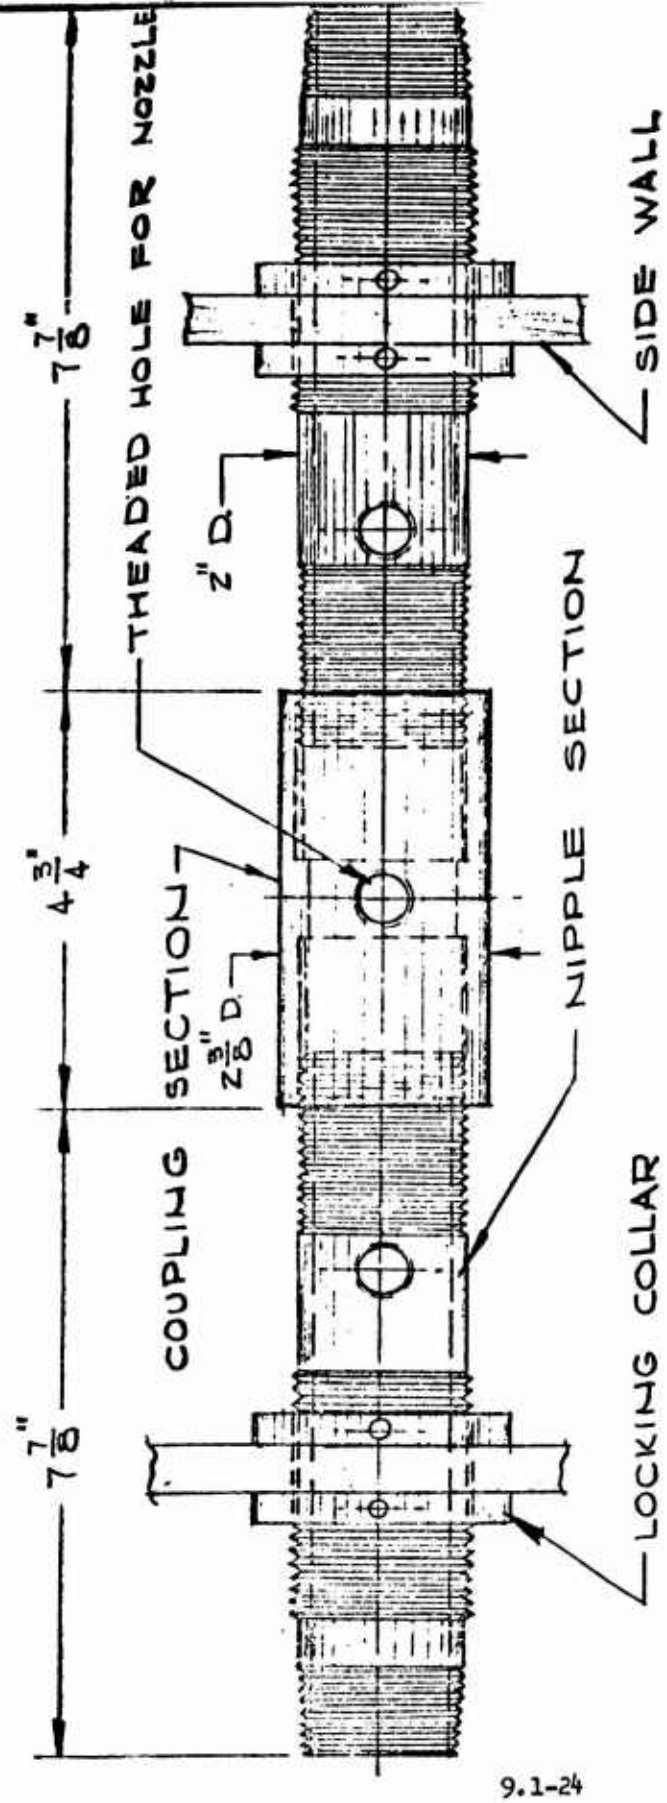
STRAIGHT EJECTOR PRIMARY MANIFOLD
